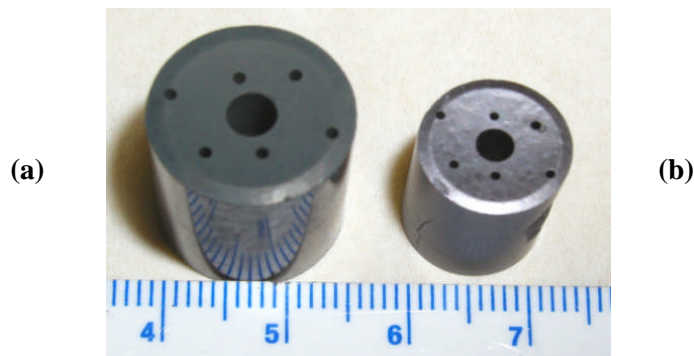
(a) Compacted and drilled (unsintered) pellet and (b) a finished pellet after sintering (manufactured at CRL-CNL)
